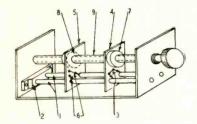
Tuner mechanism. 1—Resonant line elements; 2-Low loss, low-capacitance line support insulator; 3-Silver shorting contact; 4—Insulating carriage; 5—Insulating carriage; 6—Silver 300-ohm output contacts; 7—Six-pitch drive nut; 8—Seven-pitch drive nut; 9—Lead screw with six- and seven-pitch threads superimposed.
